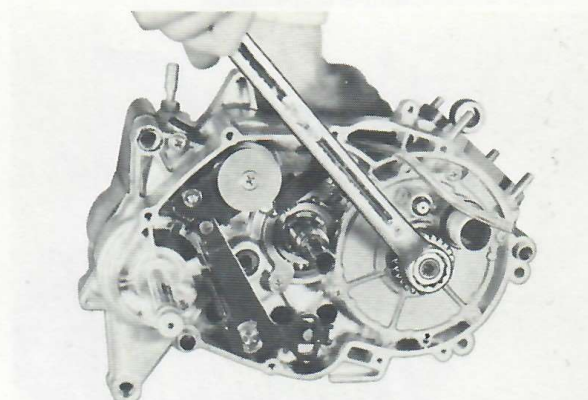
Loosening primary drive gear set nut with 21 mm wrench and piston holder (special tool No. 09910-20111)
